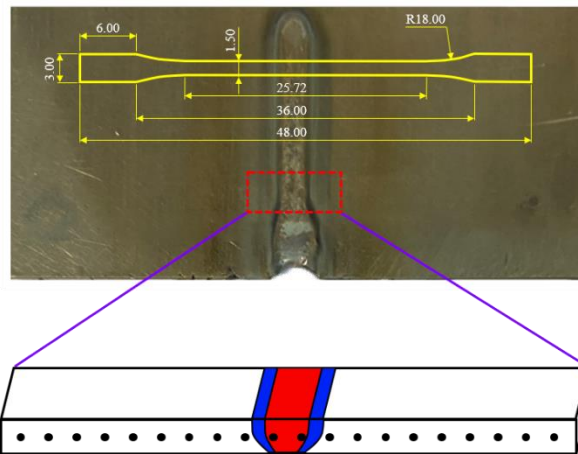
Macrograph of the welded joint (face side), white dimensions of the specimens obtained by EDM.
